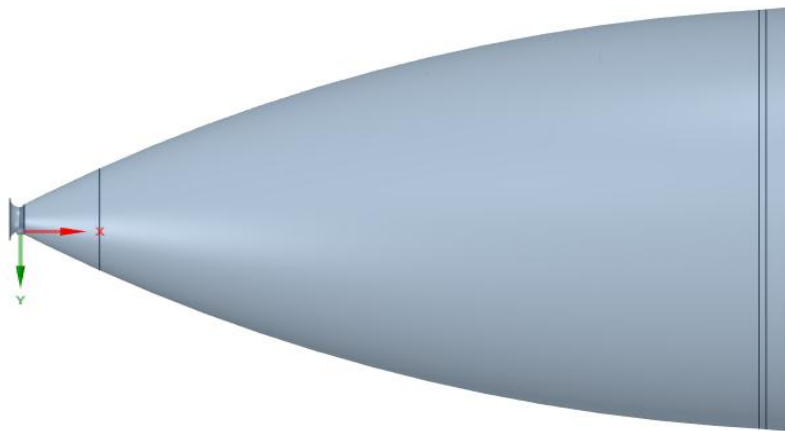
An optimized nozzle design for a gas core nuclear rocket engine.
